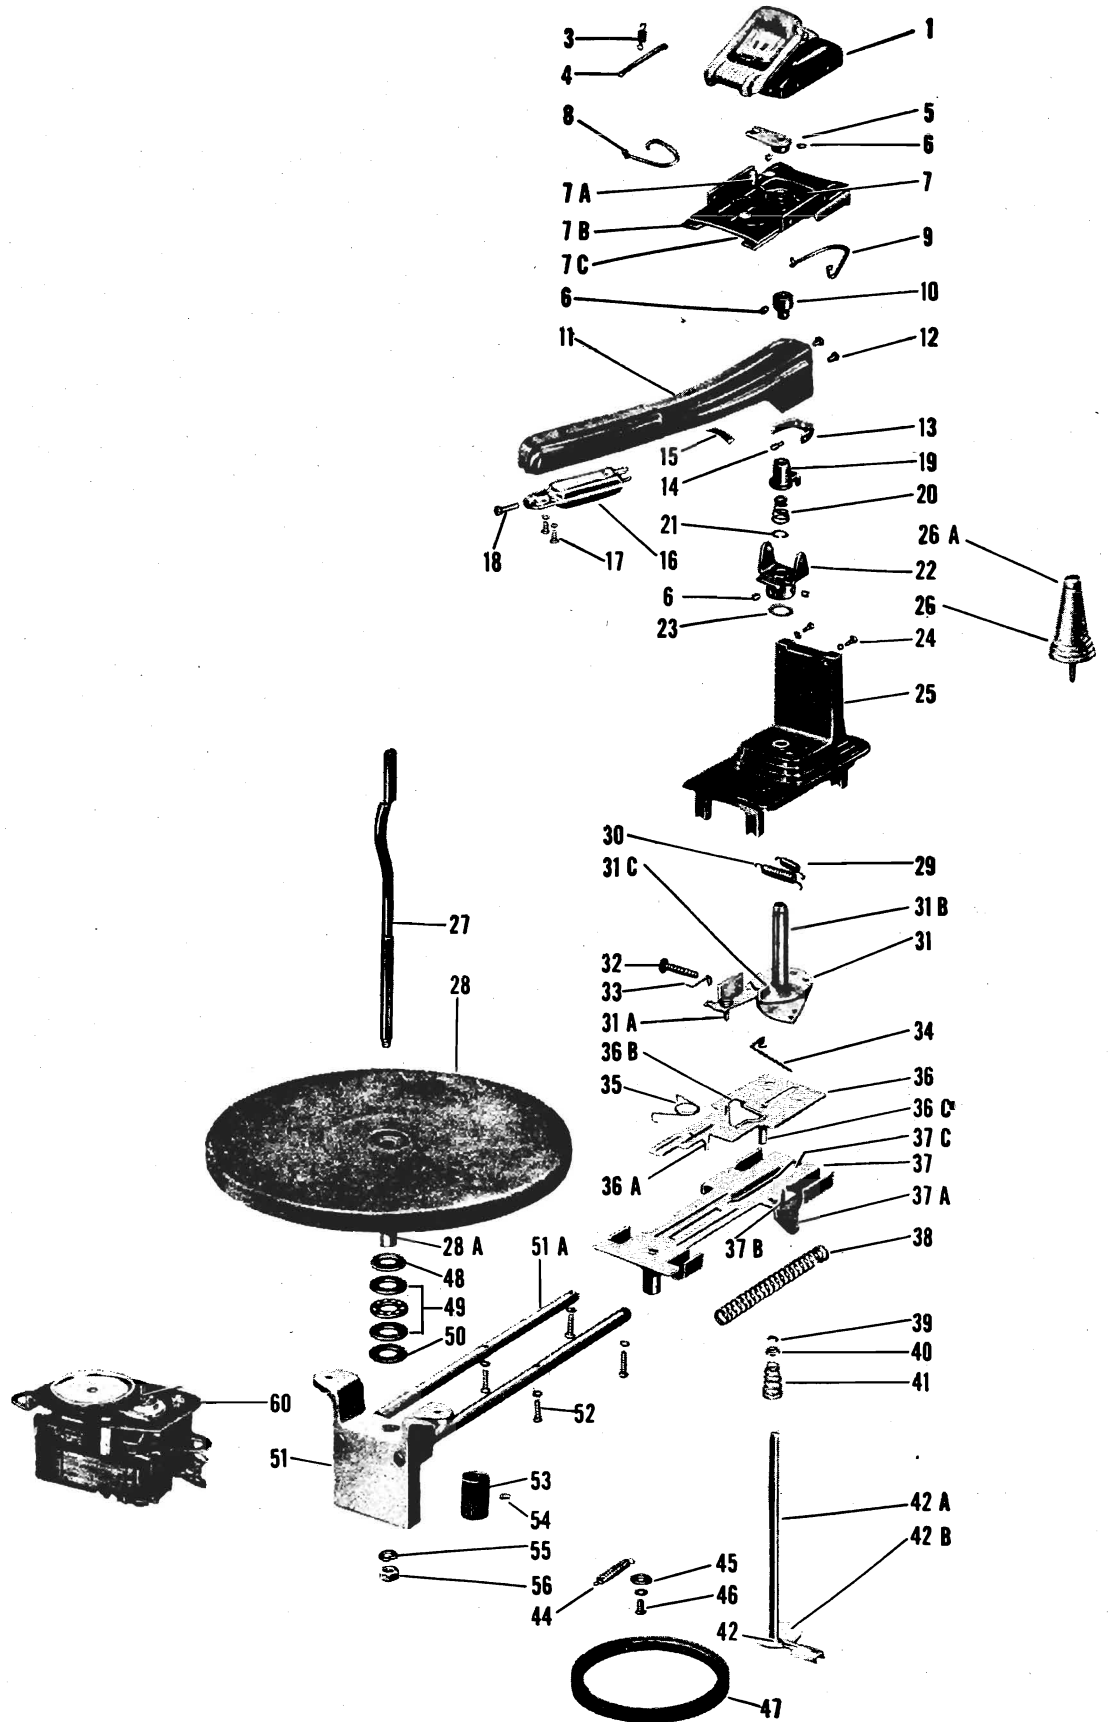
RECORD CHANGER, EXPLODED VIEW
